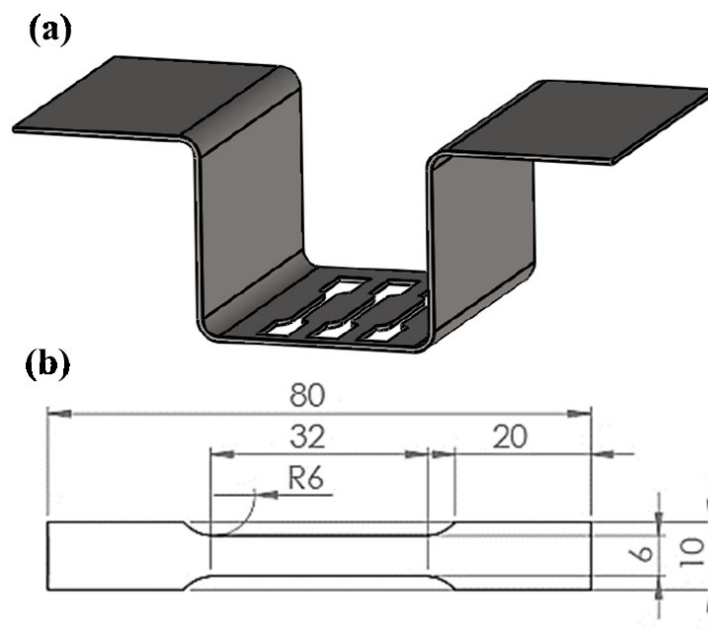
Specimen preparation for post-form strength evaluation (a) specimens machined from formed parts (b) specimen design (dimensions are in mm).
